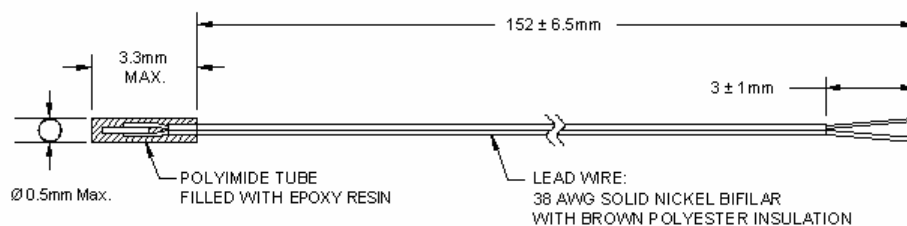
Micro-BetaCHIP thermistor probe: materials and dimensions.
